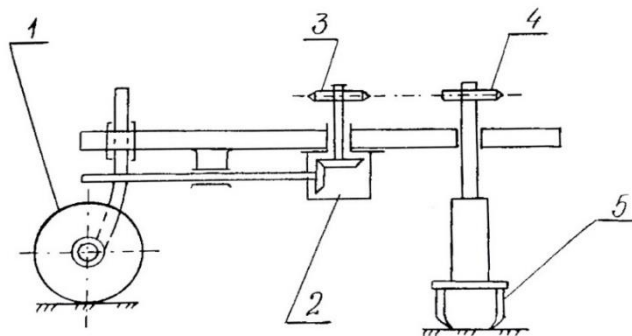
Kinematic Scheme of Driving the Milling Cutter Functioning Body of the Combined Sowing Machine. 1-Support Wheel; 2- Code Reducer; 3- 3 and 4 Driving and Reveal Stars; 5- Milling Cutter;
